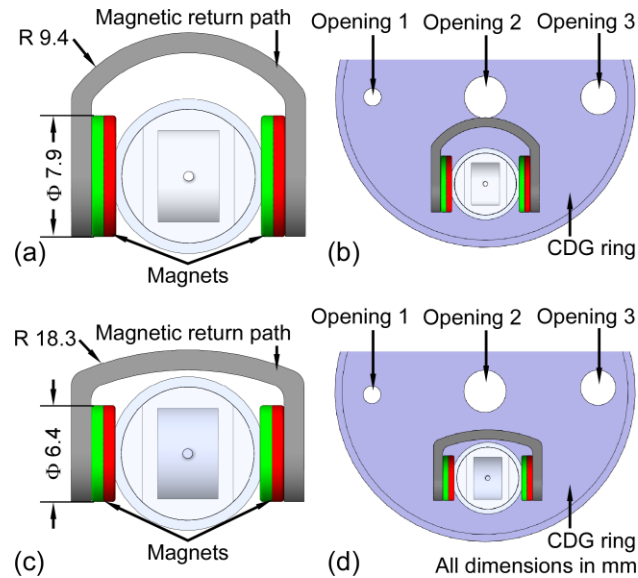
Design P.MF.2 with smaller magnets and compact magnetic return path. The Design P.MF.1 (a) top view, and (b) assembled to CDG ring. The Design P.MF.2 (c) top view, and (d) assembled to CDG ring.
